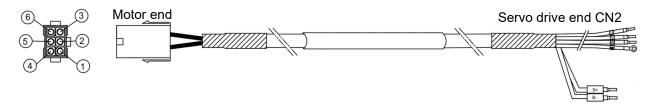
Servo motor power cable (HVPS06AB - MB, with brake cable)
